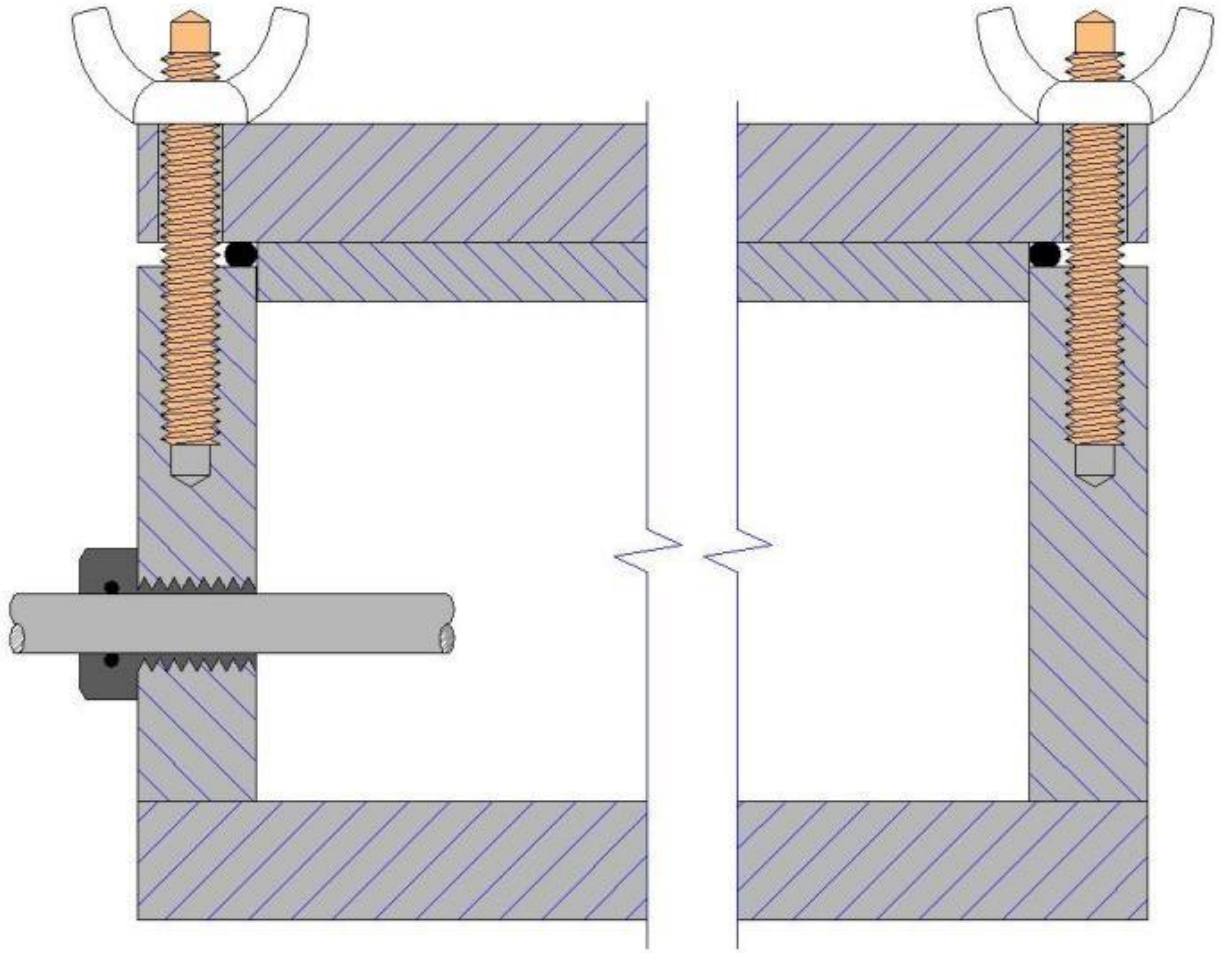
Cross section of a DIY Plexiglas O-ring sealed housing with a gland for a control shaft.
